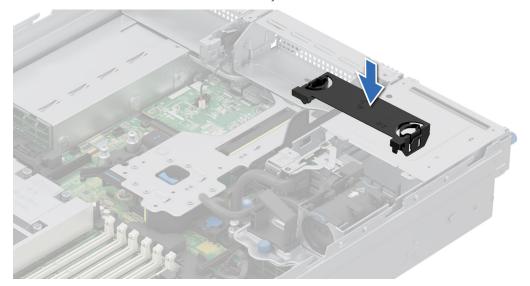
Installing the 4 x EDSFF E3.S rear drive module air shroud
